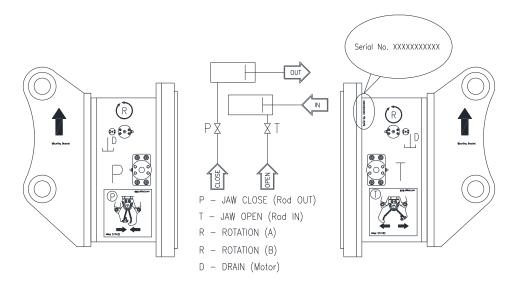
Ports Marked [P] JAW CLOSE and [T] JAW OPEN
